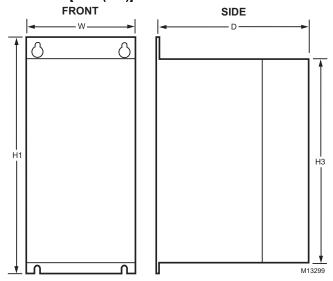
Dimensions of the NXS Variable Frequency Drives (See Table 1).
